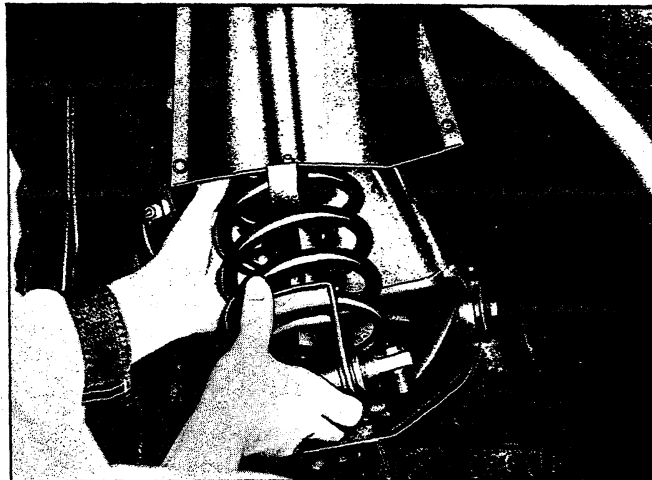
Removing Spring and Seal Assembly - Chevy II
